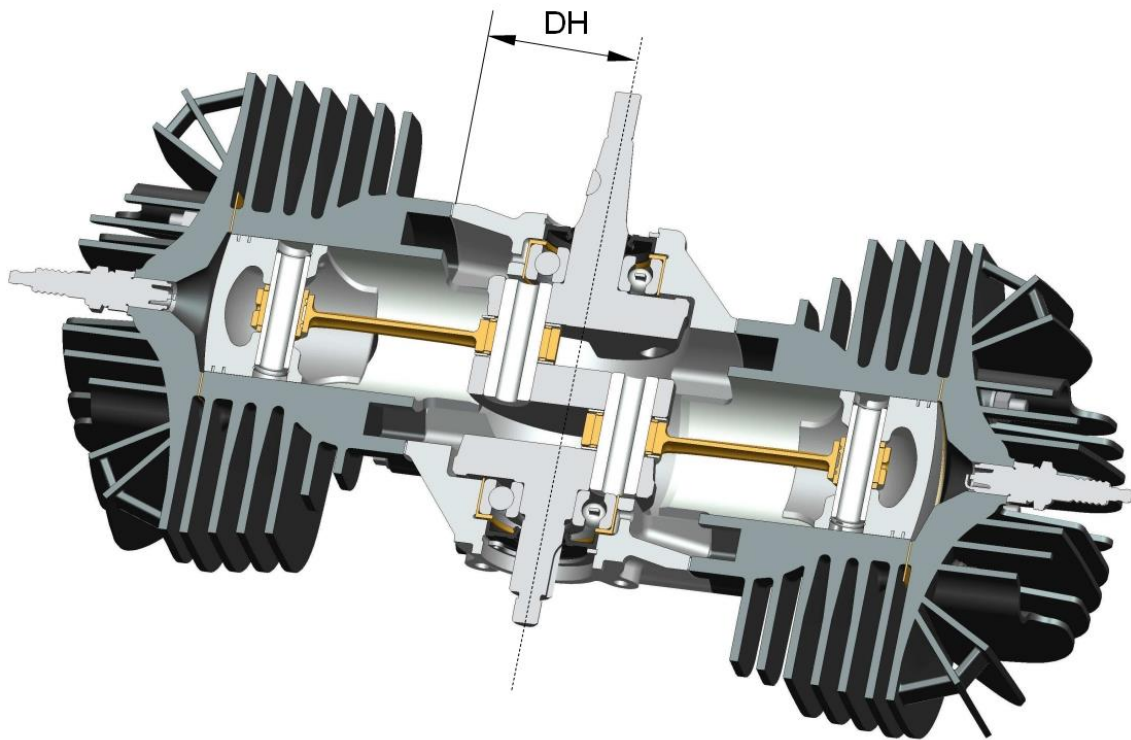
LONGITUDINAL SECTION OF THE UAV ENGINE ILLUSTRATING THE SIX MAJOR ENGINE COMPONENTS.
